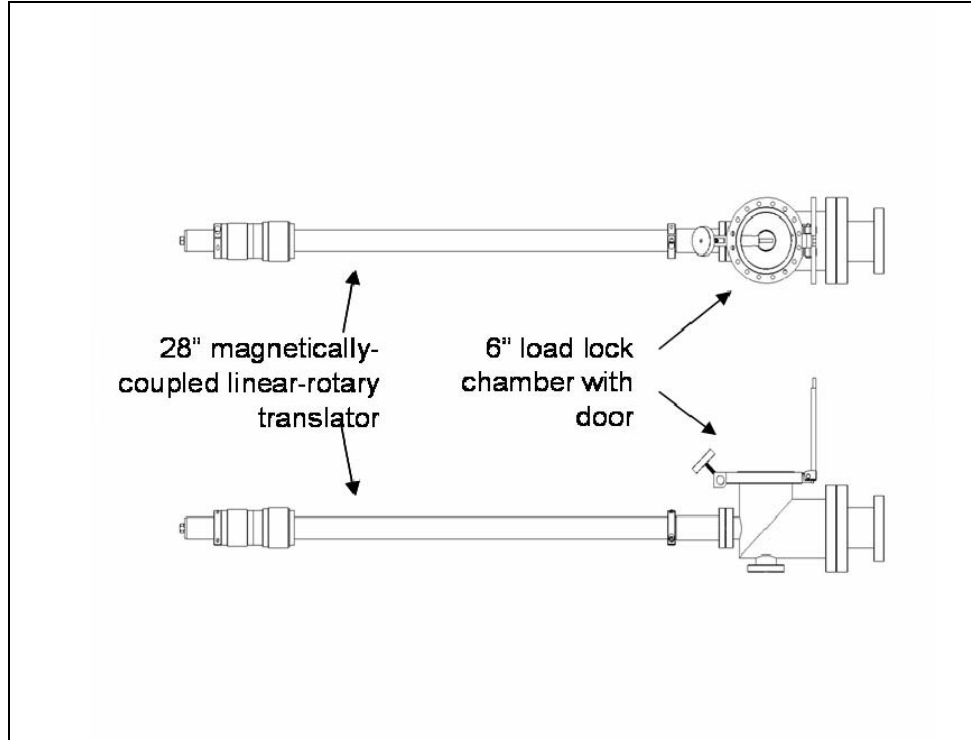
Sample transfer system. The MCLRT is attached to a 6" load lock chamber with a hinged viewport for sample loading. A 6" to 4.5" reducer is attached to the load lock chamber to allow the system to be mounted on an existing chamber viewport.
